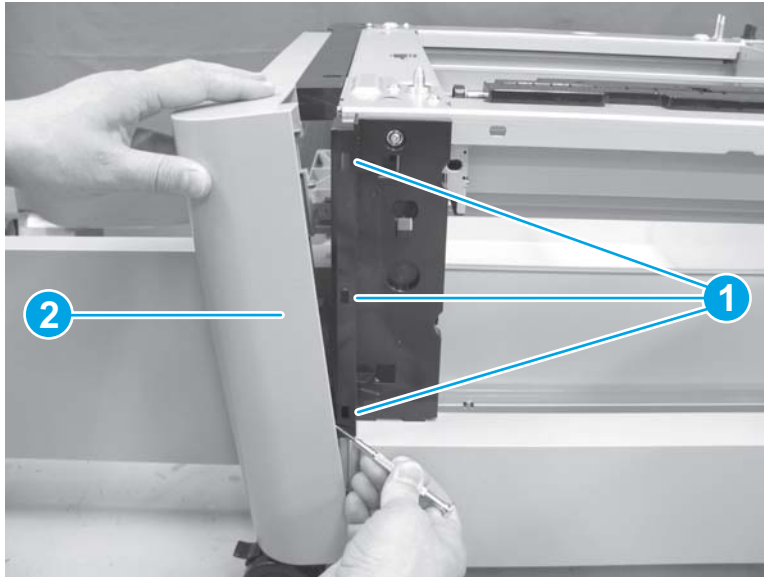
Remove the 1x500 and 3x500 right front cover (1 of 2)
